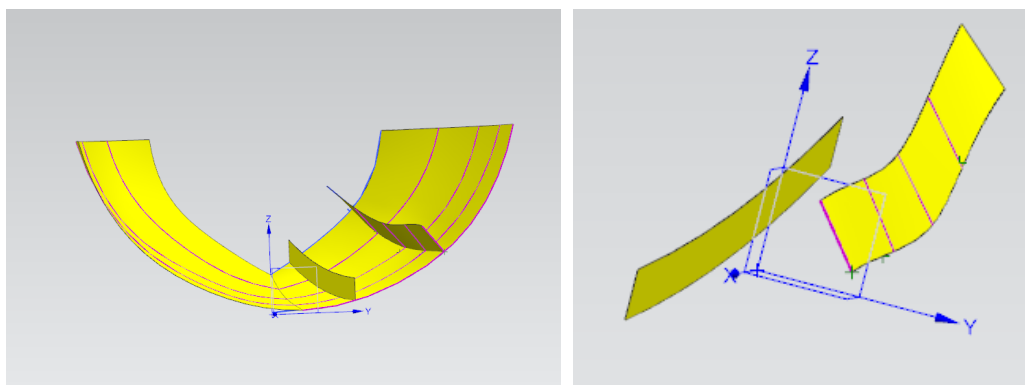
The 3D modeling of two types of arrangement of bottom side girder
